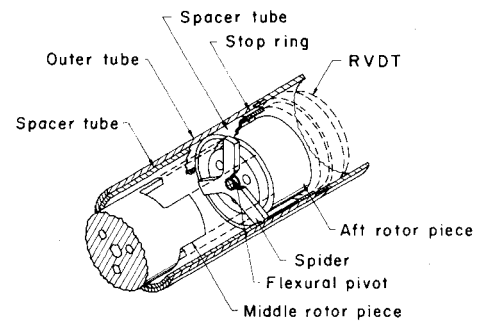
Cut-away view showing assembly of flexural pivot and related parts.
